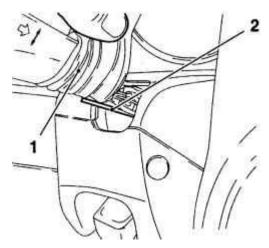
Installing knockout: 1 - anther 2 - hammered
